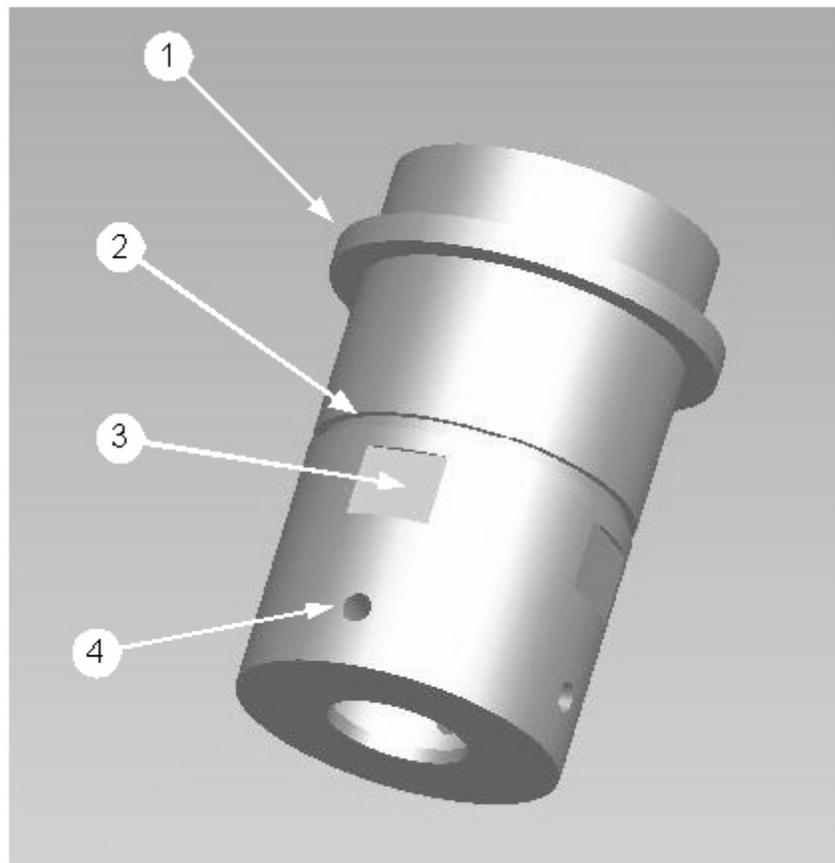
RHT-Bearing Carrier selected details: 1) BC-lip, 2) BC-snap ring groove, 3) BC-flat (X2), and 4) BC-machine screw hole (X4).
